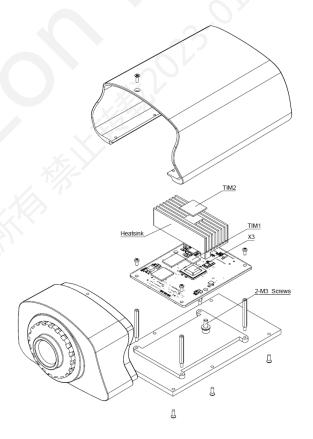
X3 thermal solution assembly example in IPC-exploded view
